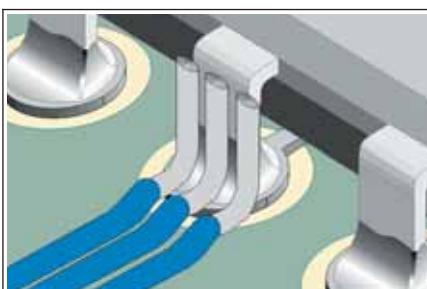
Acceptable Wire looped and soldered to adjacent component leads.
